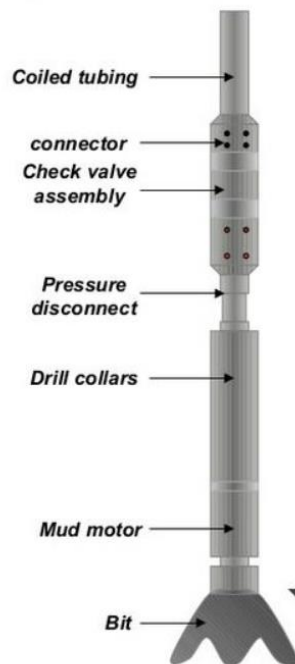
An example of a Bottom Hole Assembly, BHA [8]
